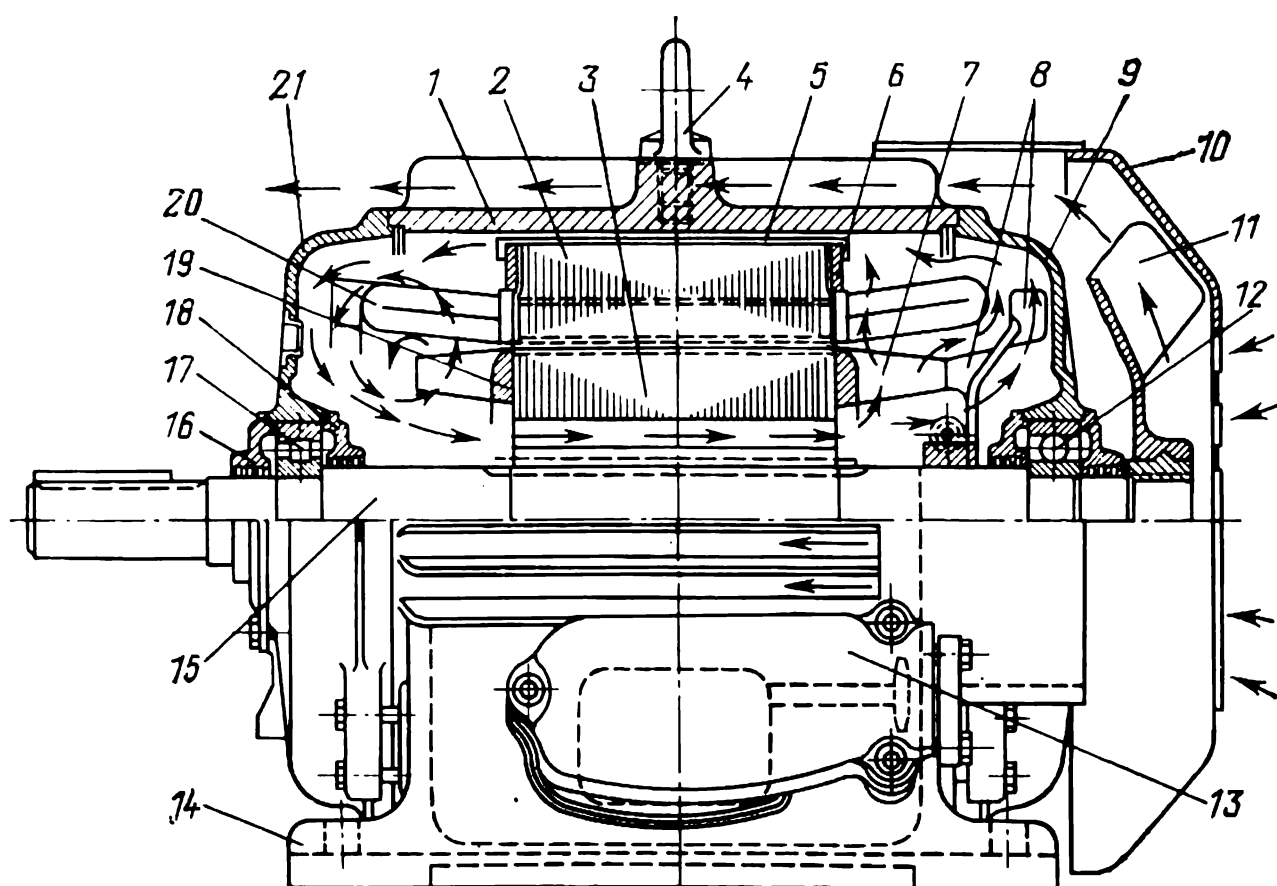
A 55-kW, 1500-rpm, 50-Hz, totally enclosed, blower-cooled squirrel-cage induction motor
